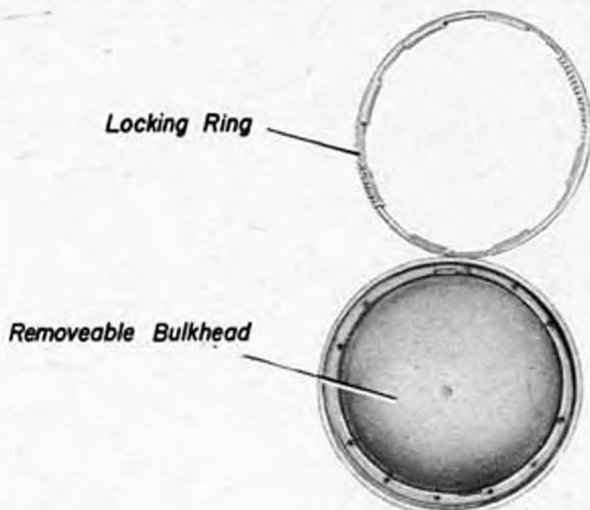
Forward End Of Airflask Showing Bayonet Locking Ring Removed
